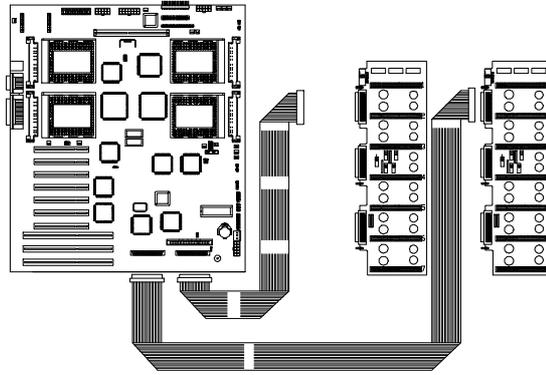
Fast-Wide SCSI HDDs or Ultra-Narrow HDDs (Single-Channel Configuration for Both Backplane Boards - 20 MB/sec or Below)
